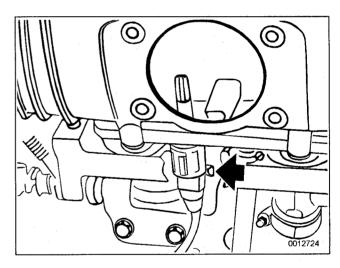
M52/S52US engine: Intake air temperature sensor location in bottom of intake manifold (arrow). Throttle housing shown removed.
